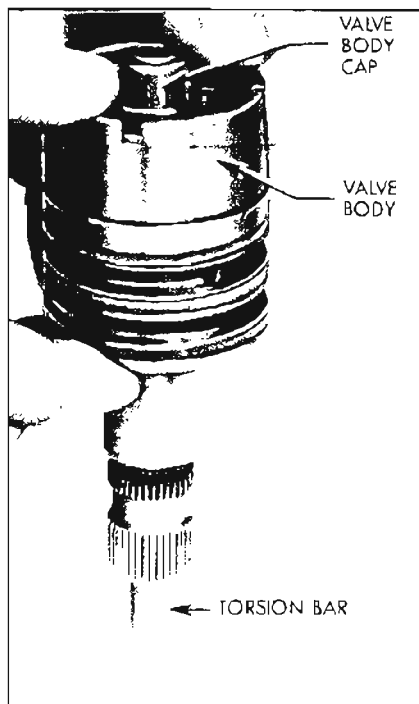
Removing Stub Shaft, Torsion Bar and Cap Assembly From Valve Body
